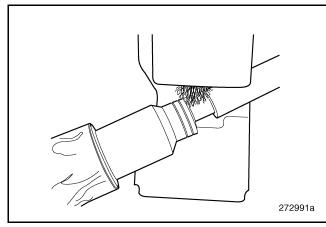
Cleaning Injector Cap Nut Seat Surface
